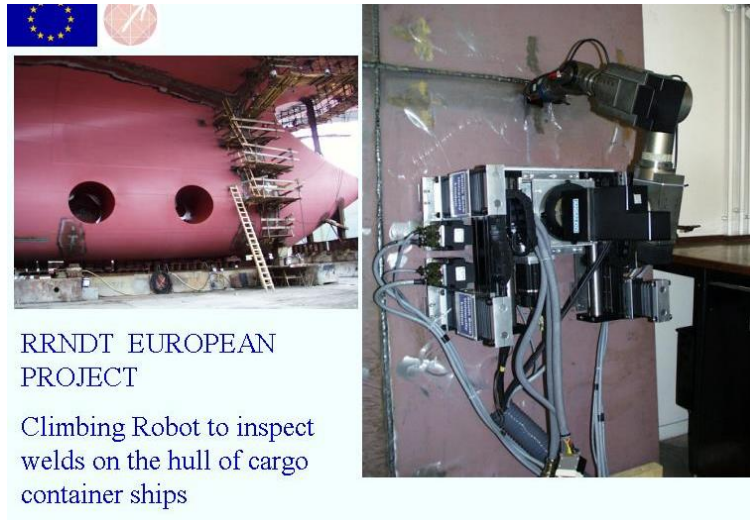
Magnetically adhering robot for inspection of large areas such as weld lines on container ship hulls. In the illustration an ultrasonic sensor deployed by a 7-axis arm can be seen engaging a weld line.
